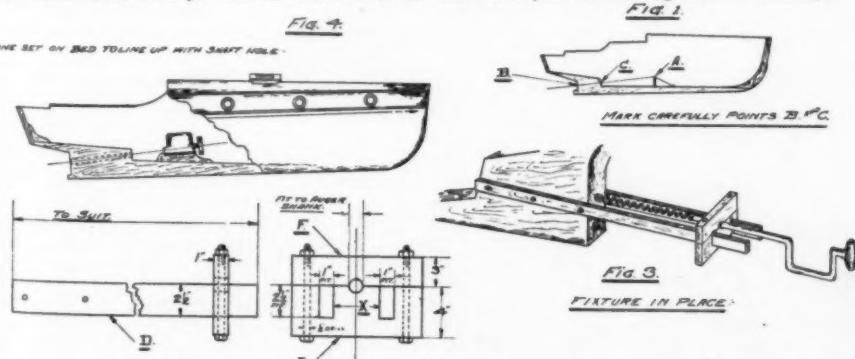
Method by which Mr. Bradley obtains the line and bores his shaft log.
